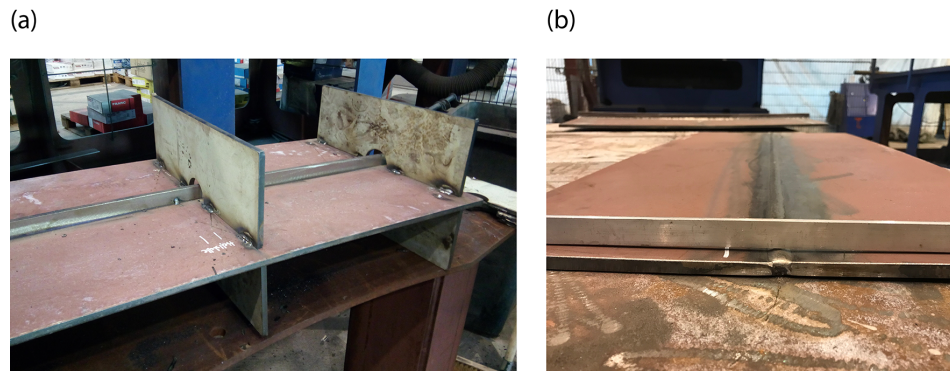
Production of fillet- (a) and butt-welded joint (b) plates for the test programme, taken from Braun et al. (2021a)
